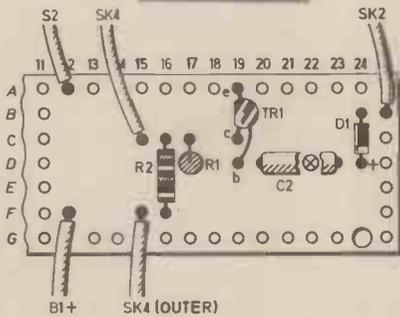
Stripboard layout. There is only one break to be made and this is under C2 at location D22. A large board has been used so that the amplifier can be incorporated easily at a later date, hence the board is shown only in part.
